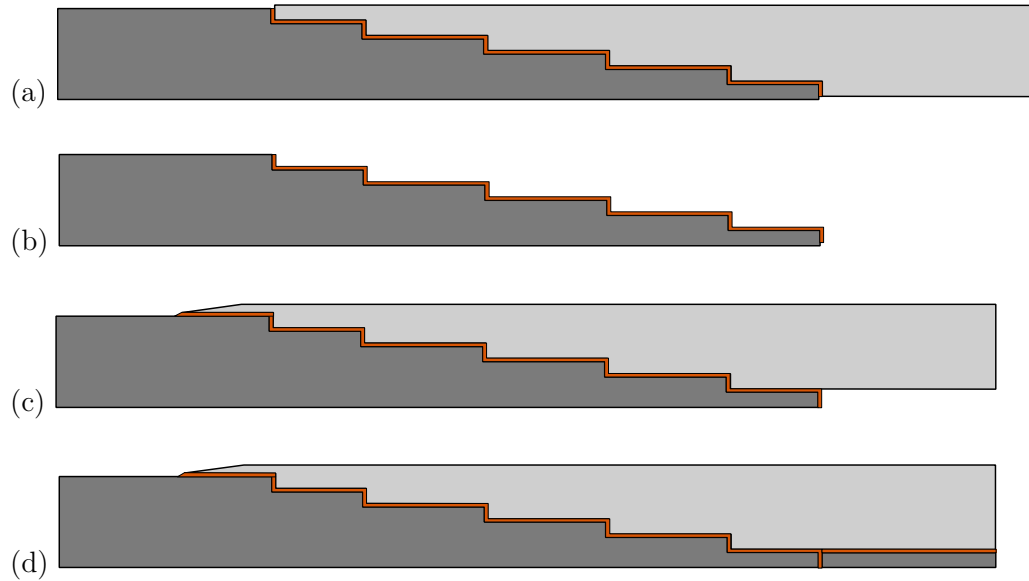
Modification of previous step lap joint (Configuration 2) with a new top overlap adherend
